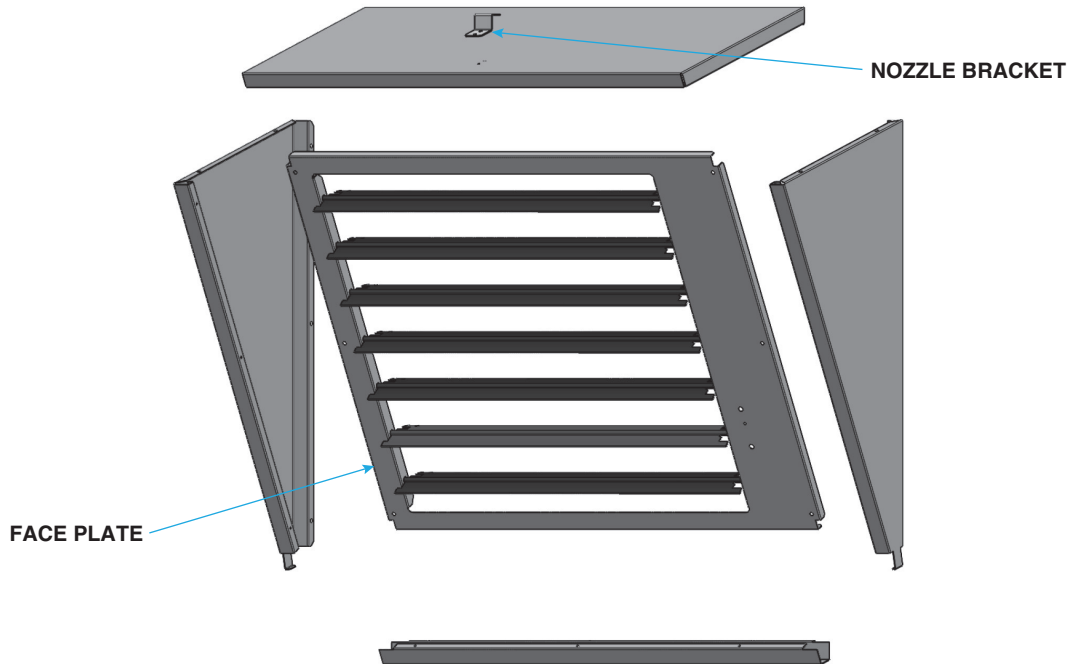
Hydronic Unit Heater Downturn Nozzle Assembly
